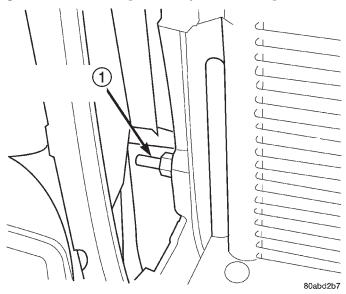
Radiator Petcock—2.5L/4.0L (LHD/RHD)
